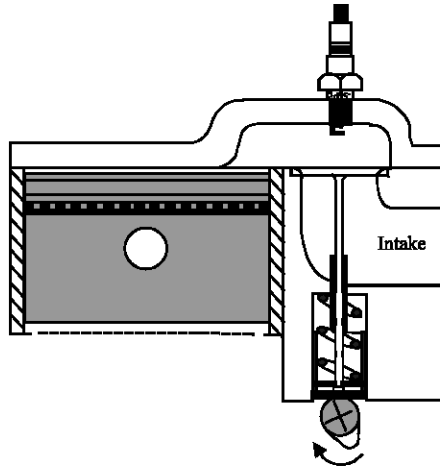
Cylinder and air intake valve configuration of a side-valve engine
